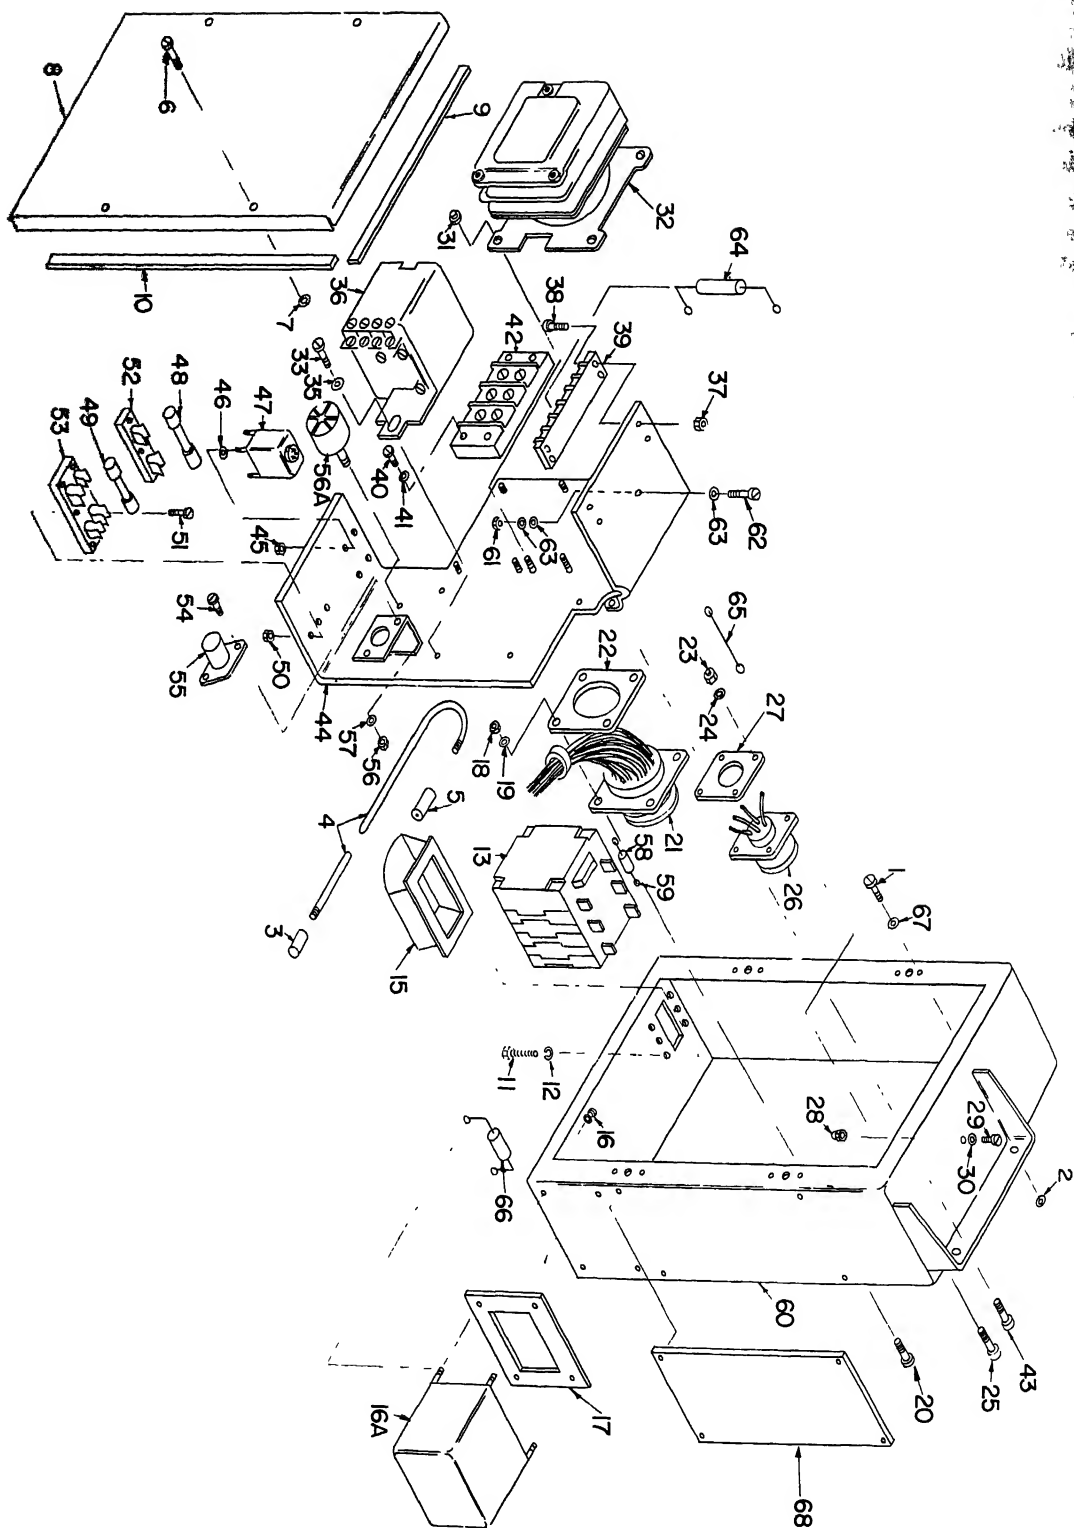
Junction box assembly, exploded view—(Model CV-20-4-08 only)
